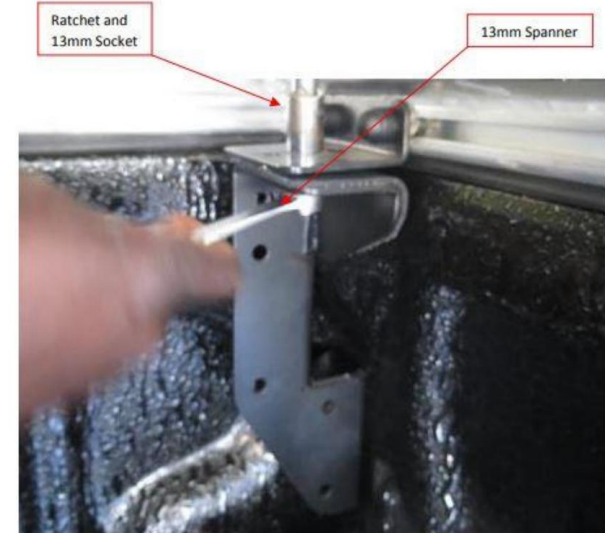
Tighten Bolt for Universal-Front Support Bracket
